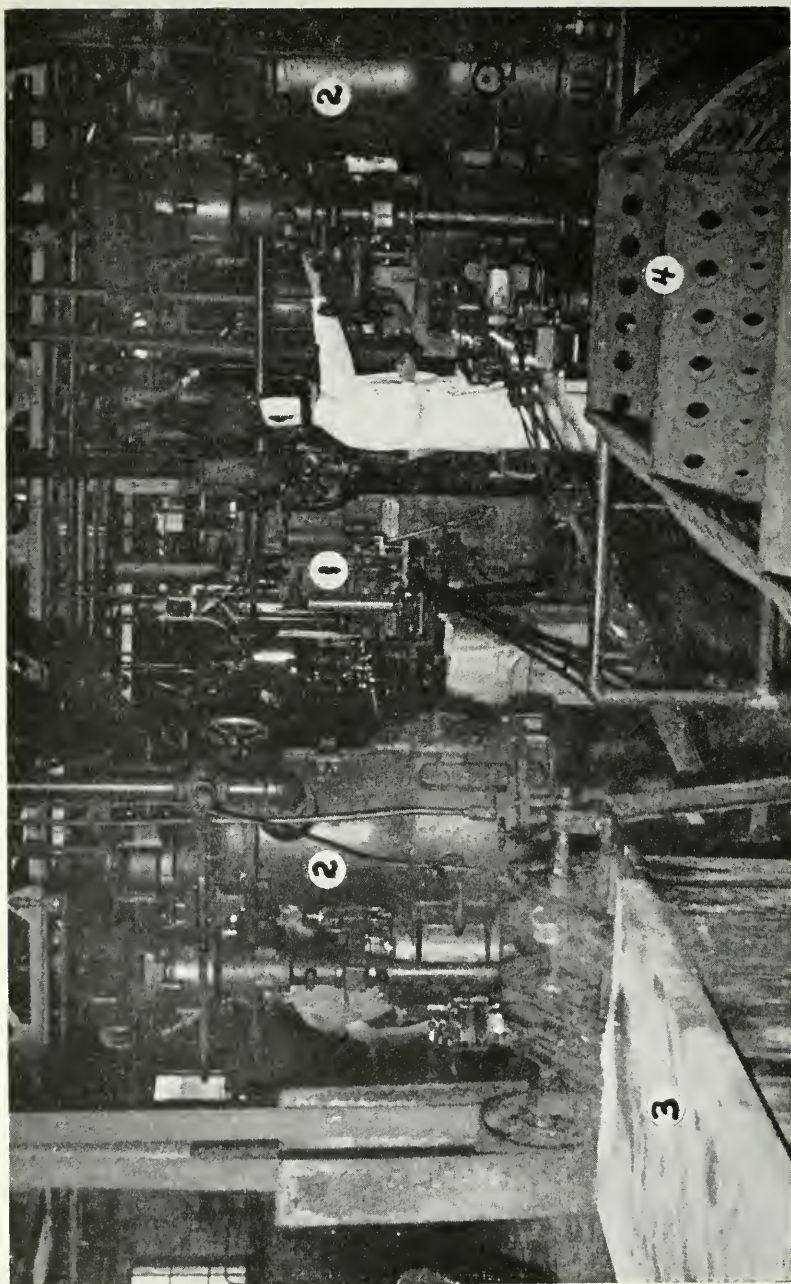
General view of vacuum closing machinery. The girl operator is placing lids in the capping machine. A stack of lids may be seen directly to the left of figure "1" which indicates a capping machine. The vacuum machines are marked "2." Tins may be seen emerging from the machine on the right. They are washed in the vat marked "3." Retort baskets marked "4" are seen in the lower right corner.
